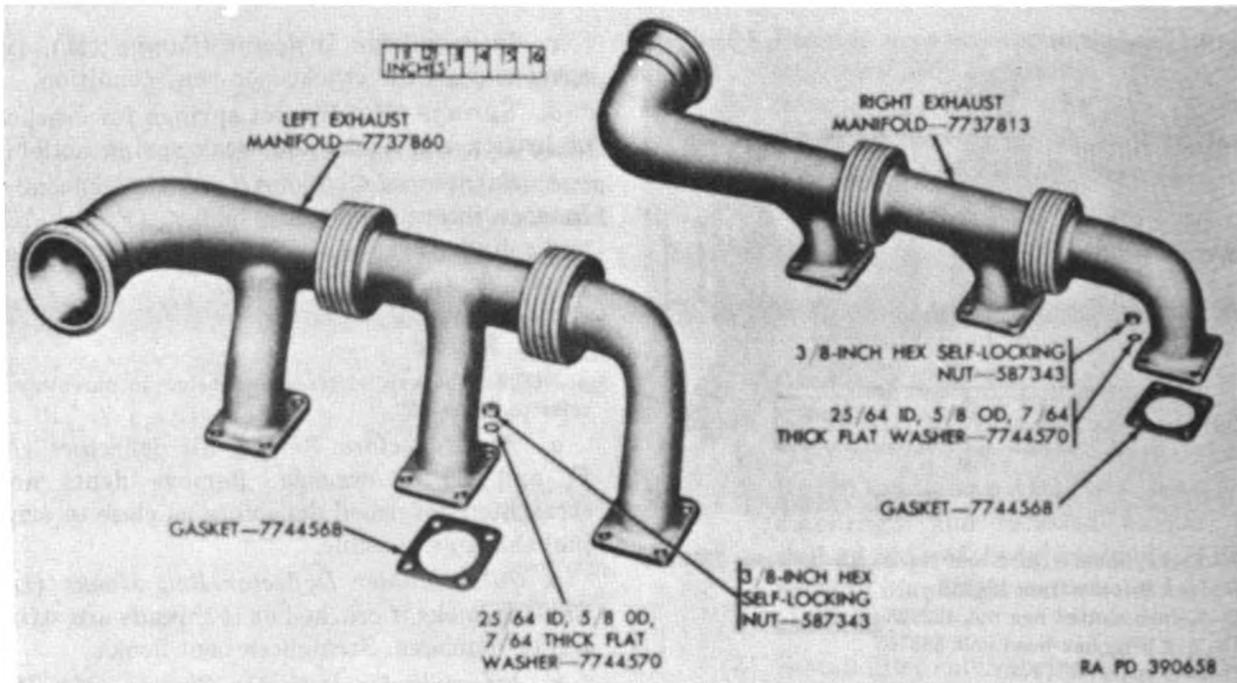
Exhaust manifolds (model AOSI-895-5 engines only)—exploded view.
